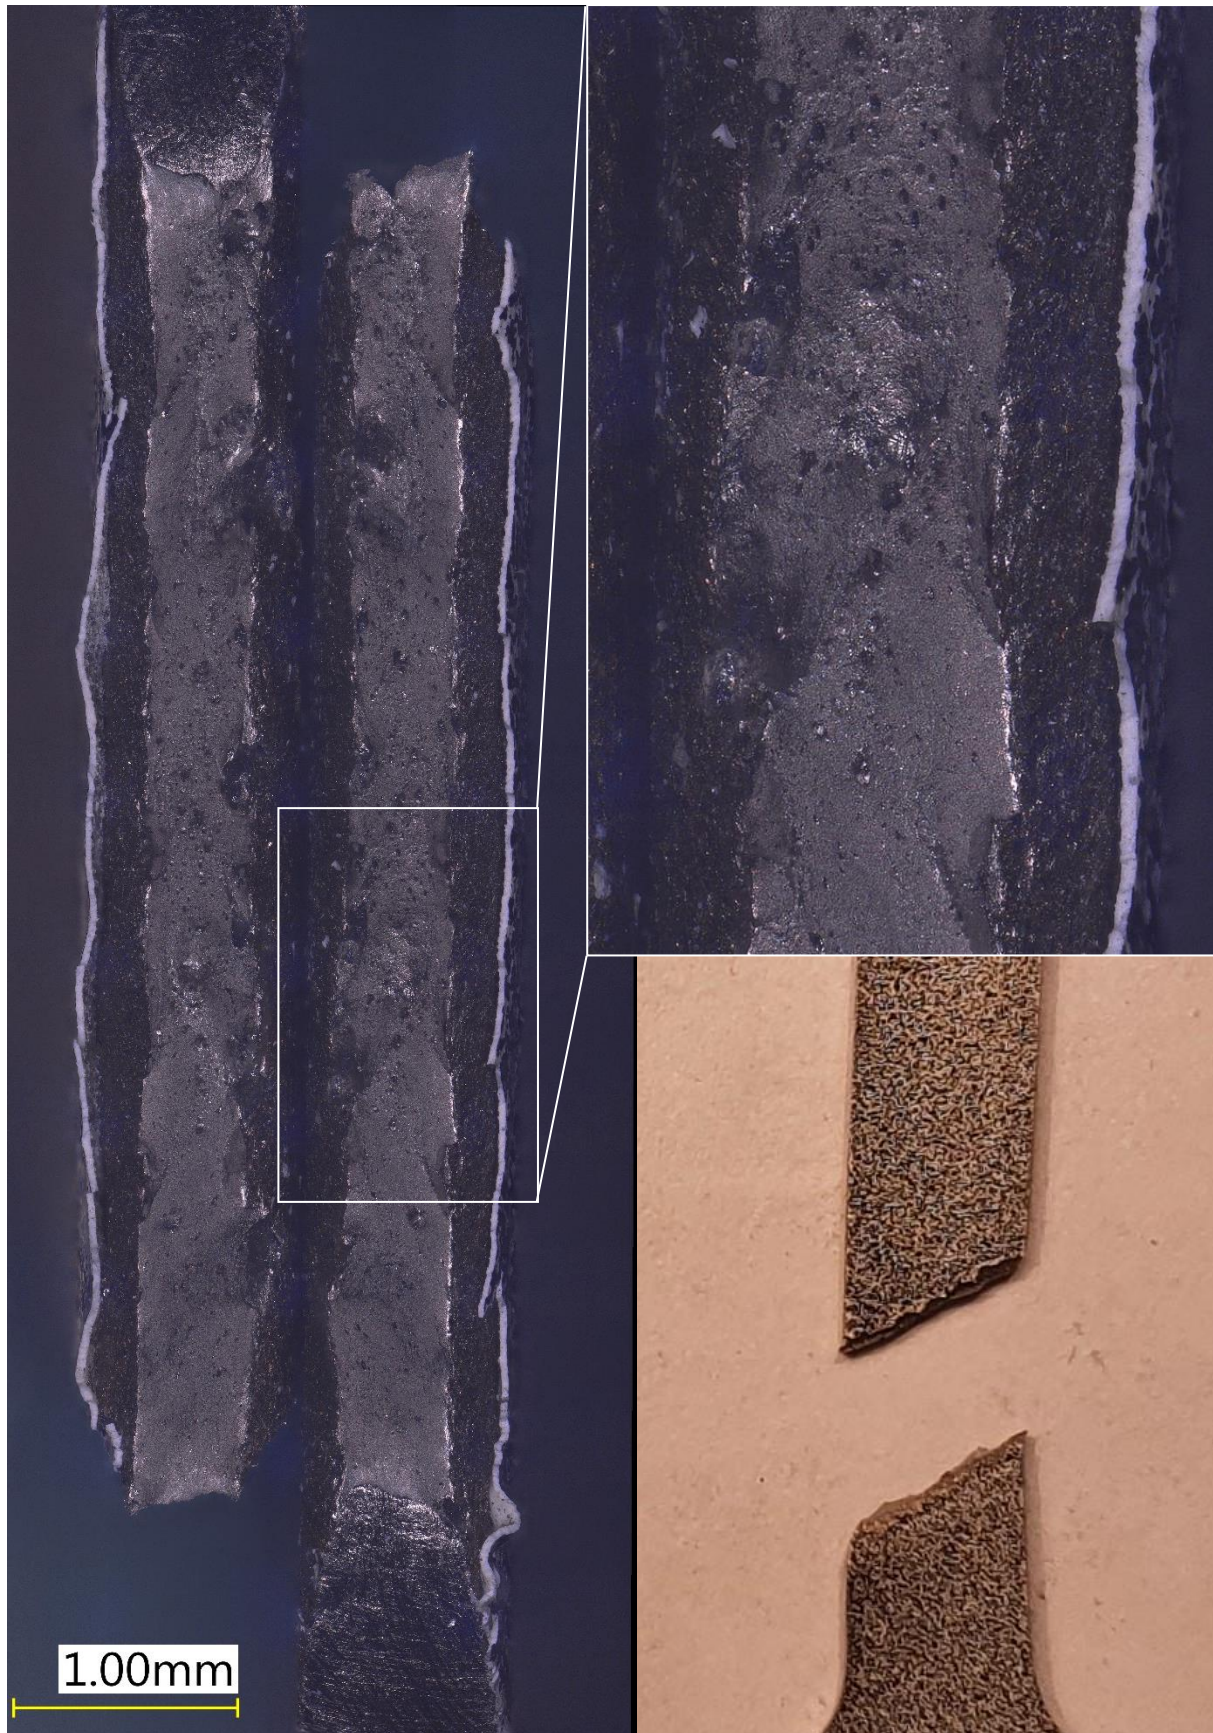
Fracture surface of a C300 SLM Z-direction sample
